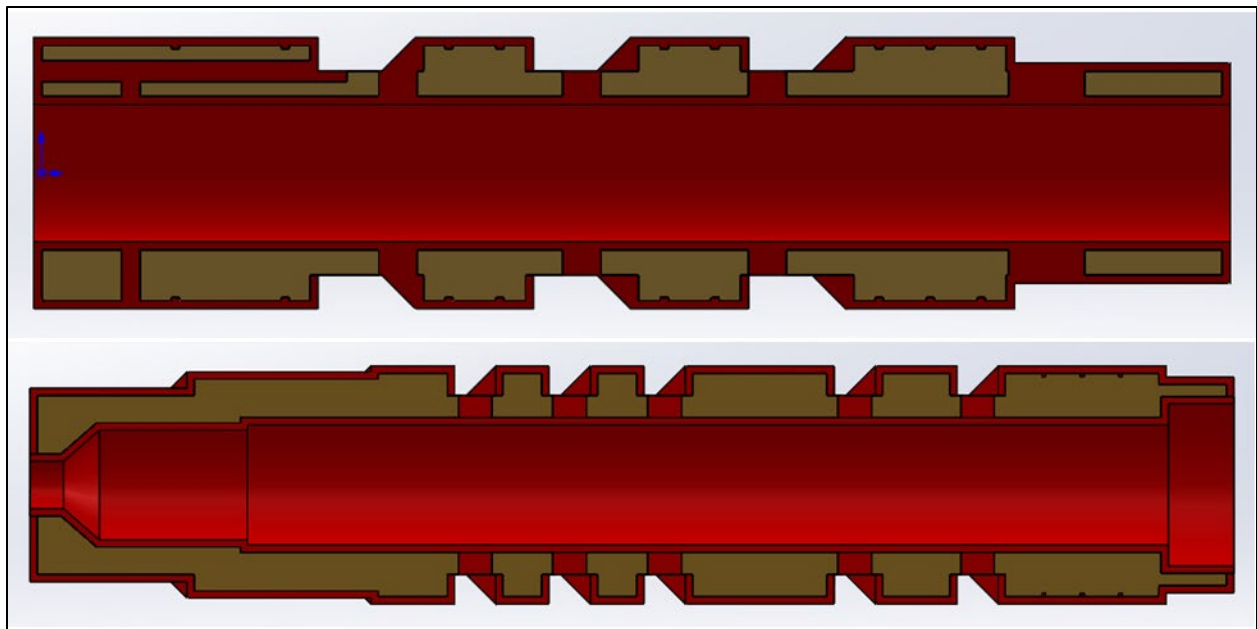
Additional material (shown in red) added to the 3D models of the aluminum bronze pilot valve sleeve (top) and gate limit valve (bottom).
